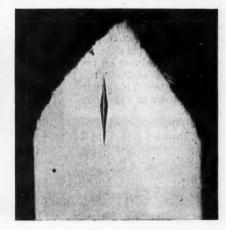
Knoop indentations on a longitudinal section at the tip of the 0.0068-inch drill shown in Fig. 10 (X250).
